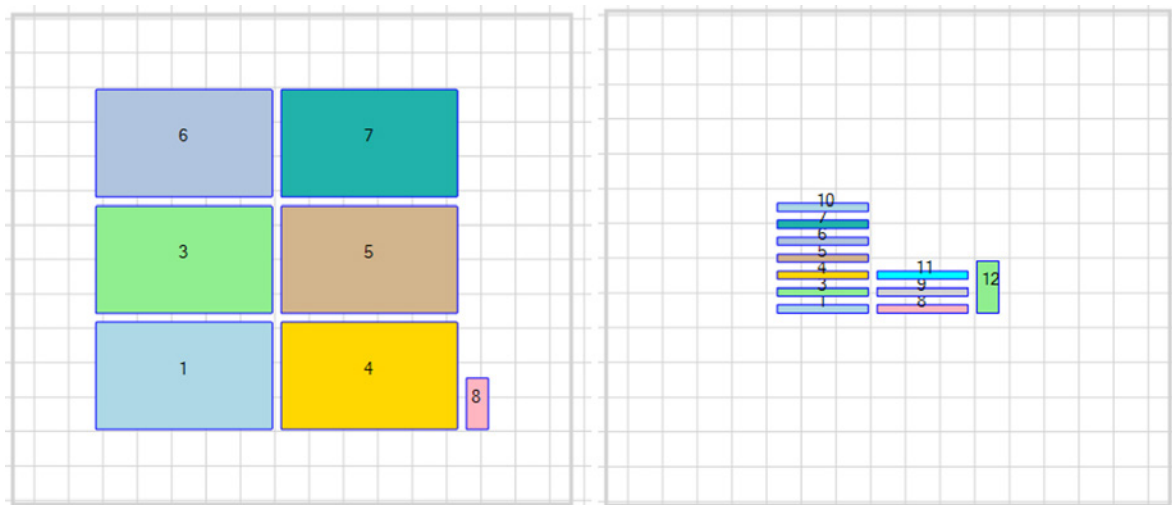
Print layout for dimensional parts (left) and physical-analysis (right).
